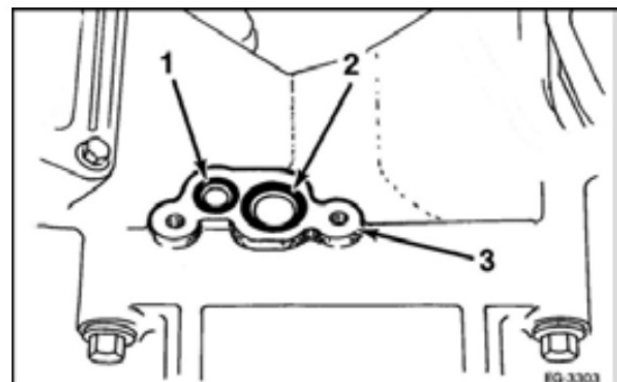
Turbocharger Oil Supply O-Ring and Oil Drain O-Ring
